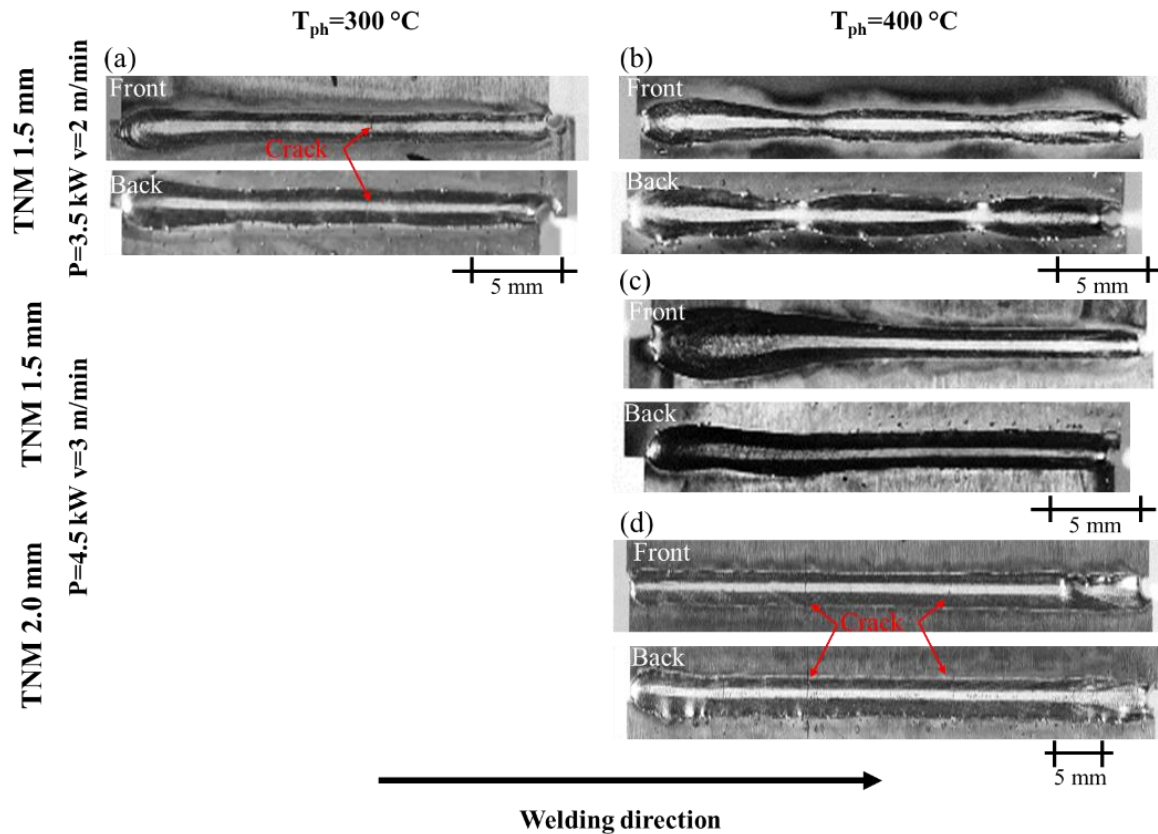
Photographs of similar TNM joints welded with different sheet thicknesses, welding parameters and preheating temperatures.
